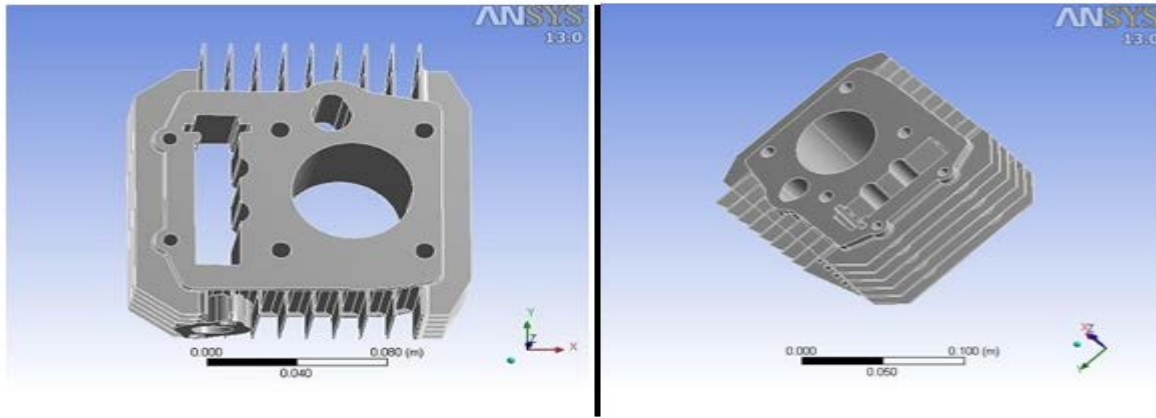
Dimensional Petrol Engine Cylinder Model
